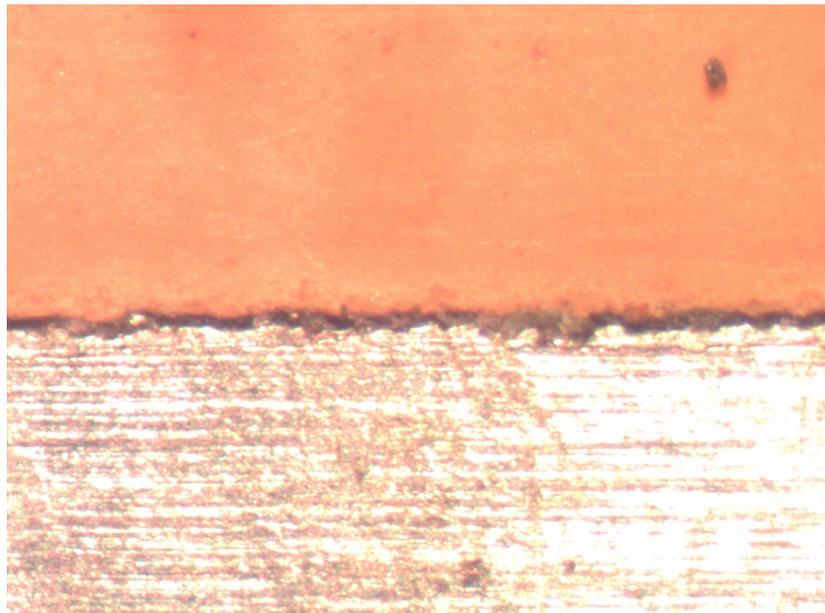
125°C Epoxy 2 on FLEX Test Board Aluminum Edge Crack
